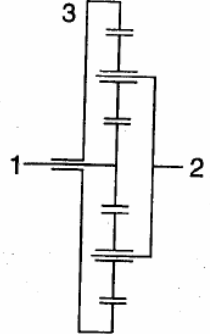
Inboard epicyclic double reduction final drive axle
